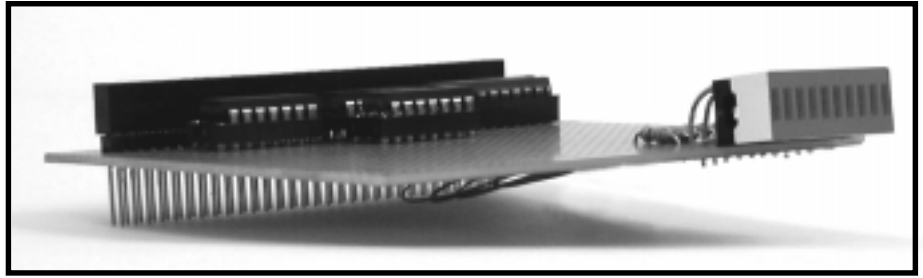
The PC/104-based POST board based on a hole-per-pad prototype board.
